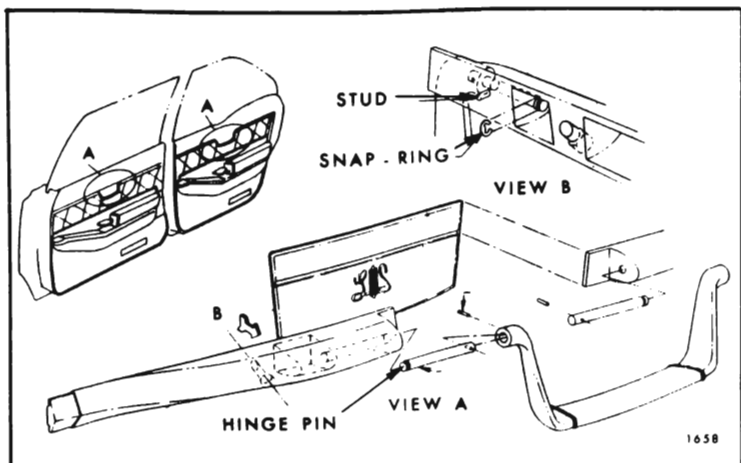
Door Pull Handle Assembly - 38669 Style
